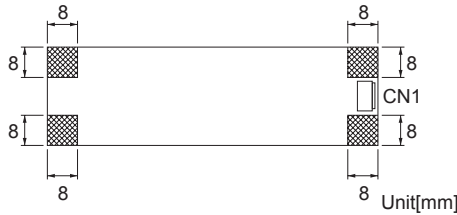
CR-HUT□-1 Allowance of metal for mounting
